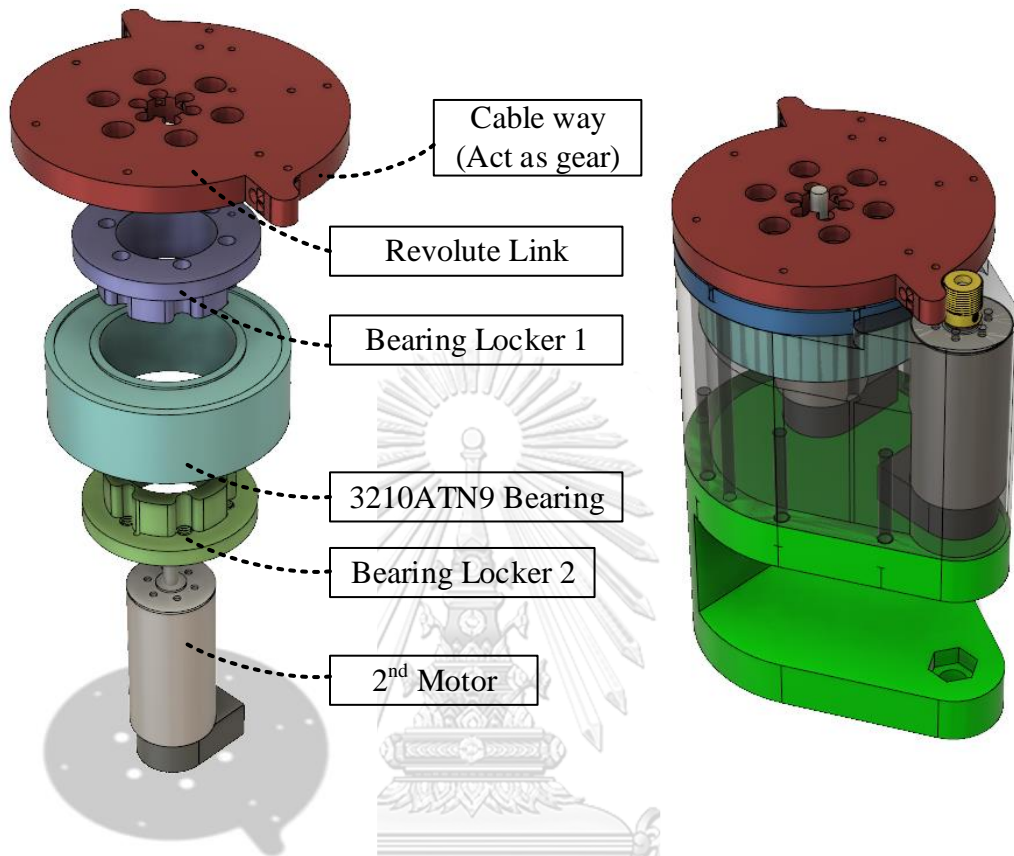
Revolute link parts before assembled (left), assembled (right).
